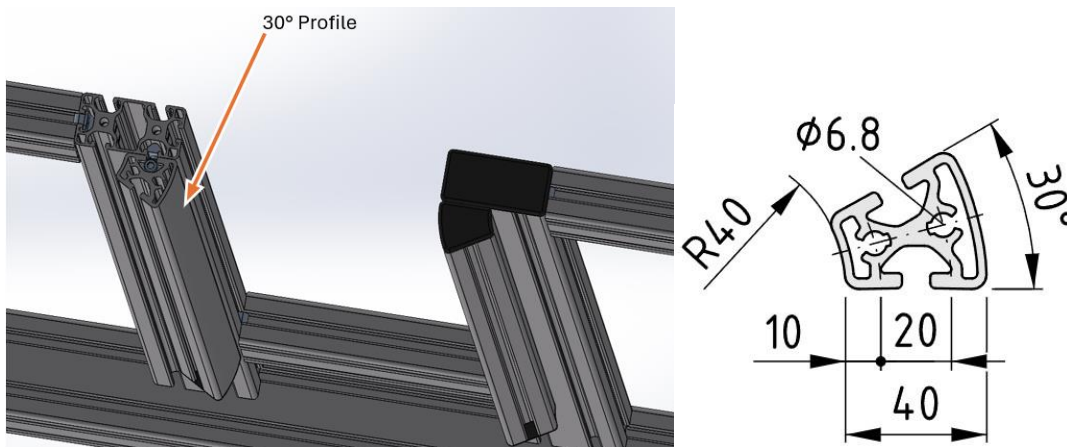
Use of angled profile pieces to support the future installation of the 30° brush seal configuration (brush strips not shown here).
